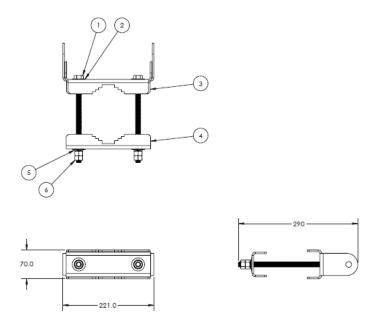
TOP & SIDE View of BOTTOM Mounting Bracket
